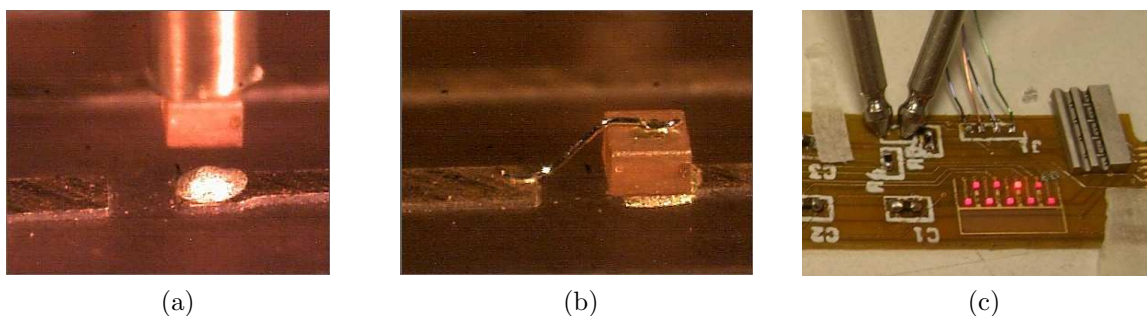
(a) Laboratory-made assembly station used to mount small devices onto the Kapton® substrate; (b) The flexible substrate with electronics and sensors already mounted and ready for assembly of optical part.
